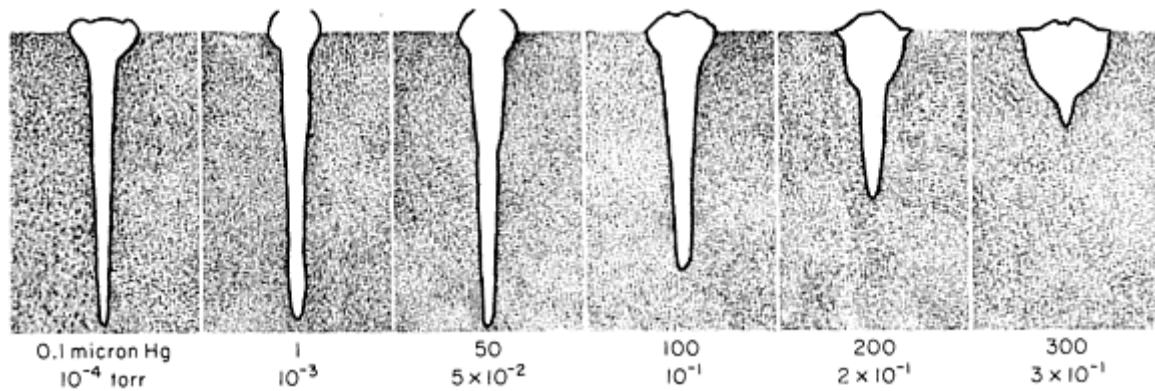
EFFECT OF WELDING-CHAMBER PRESSURE ON PENETRATION AND WELD SHAPE FOR TYPE 304 AUSTENITIC STAINLESS STEEL
